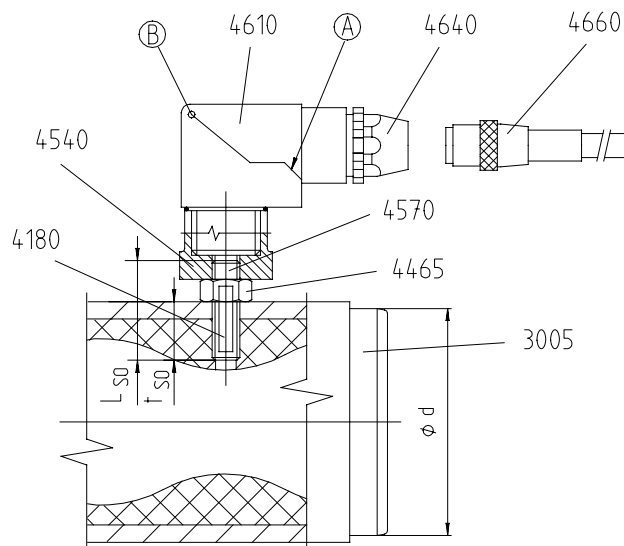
Installation temperature sensor in $d \leq 71$ mm and $d < 27$ mm diameter stators acc. to table 1
